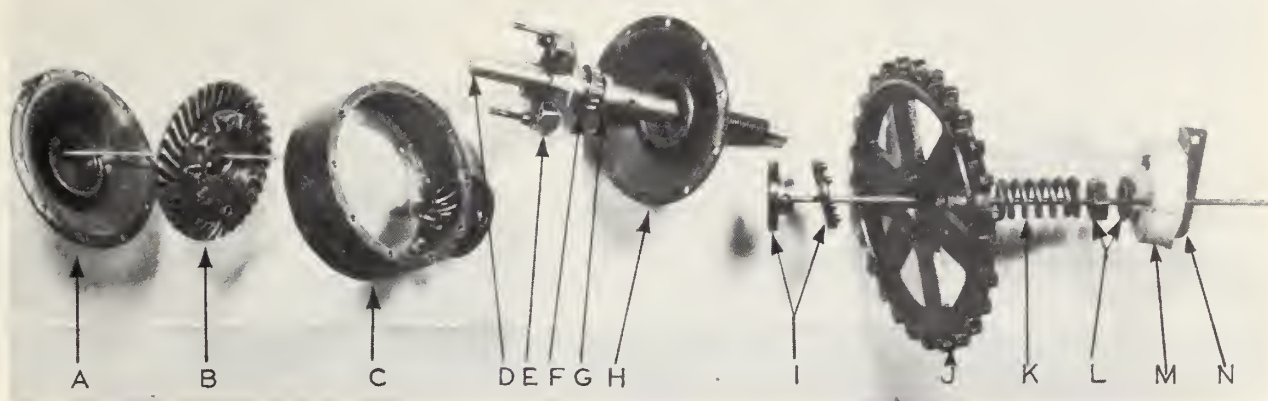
Countershaft parts ready for assembly. A, Differential housing cover, closed. B, Master gear and half of differential case. C, Differential housing and drive pinion. D, Countershaft. E, Half of differential case. F, Timken bearing. G, Grease retainer. H, Differential housing cover open for countershaft. I, Snap-clutch plates. J, 27-tooth no. 62 chain sprocket wheel. K, Clutch spring. L, $1\frac{1}{4}$ -inch lock nuts. M, Maple bearing. N, 6-inch angle iron bracket, $1\frac{1}{4} \times 1\frac{1}{2} \times 2\frac{1}{2} \times 6$ inches.
